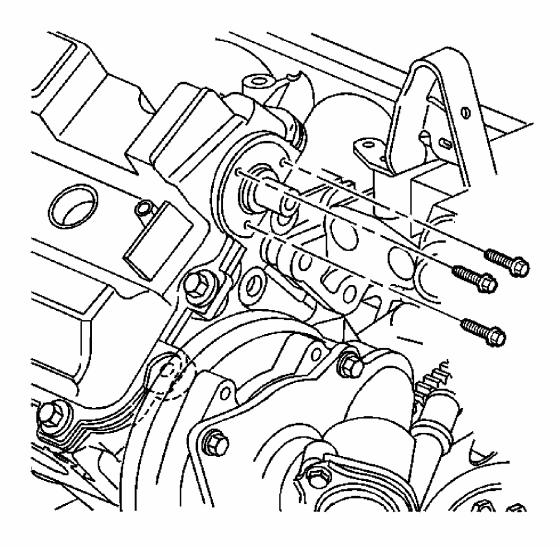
View Of Camshaft Cover Seal Screws Courtesy of GENERAL MOTORS CORP.
